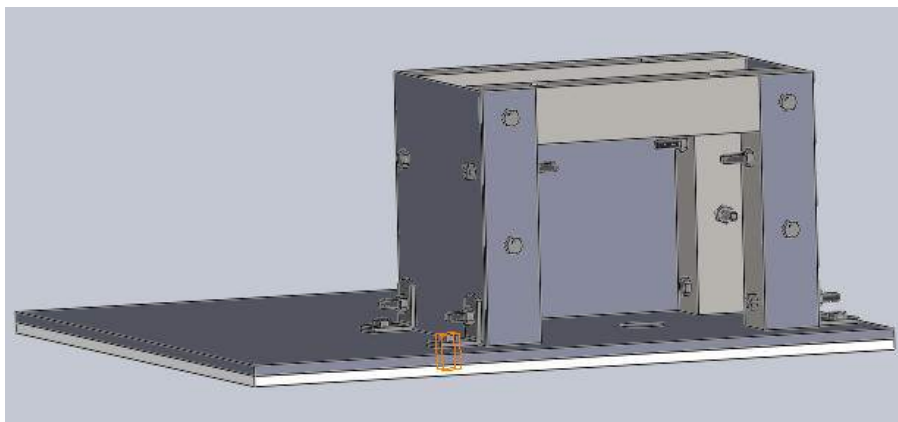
Housing for the Motor, Pulley, Driver, and Gearbox
